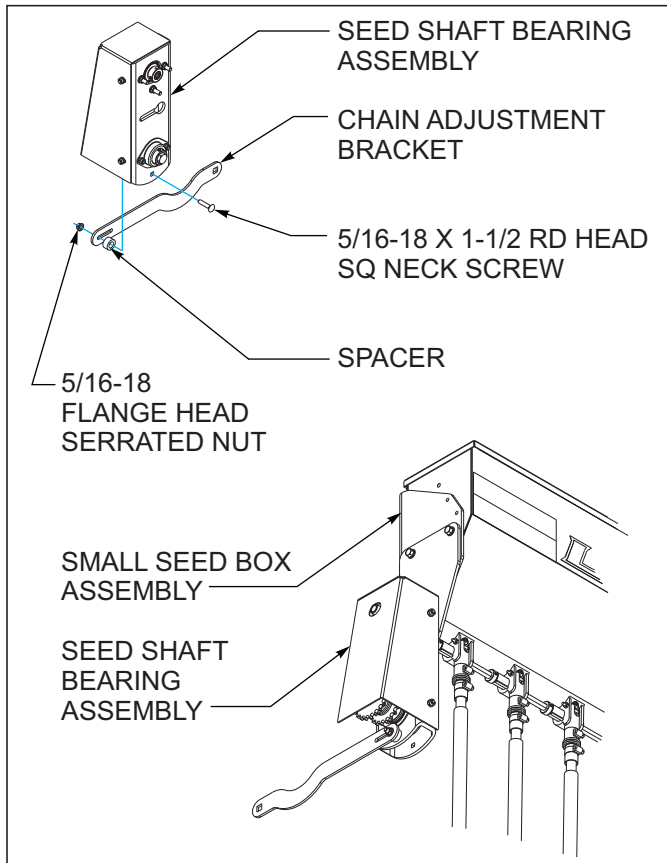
Attaching Chain Adjustment Bracket to Small Seed Bearing Assembly
